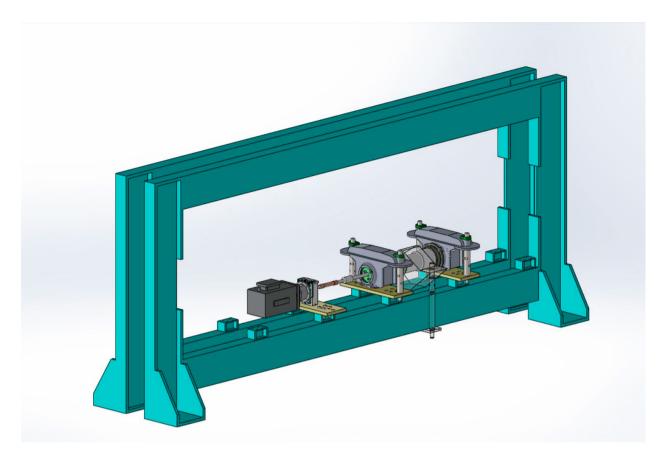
3D Drawing of the 3 axle-box test rig.
